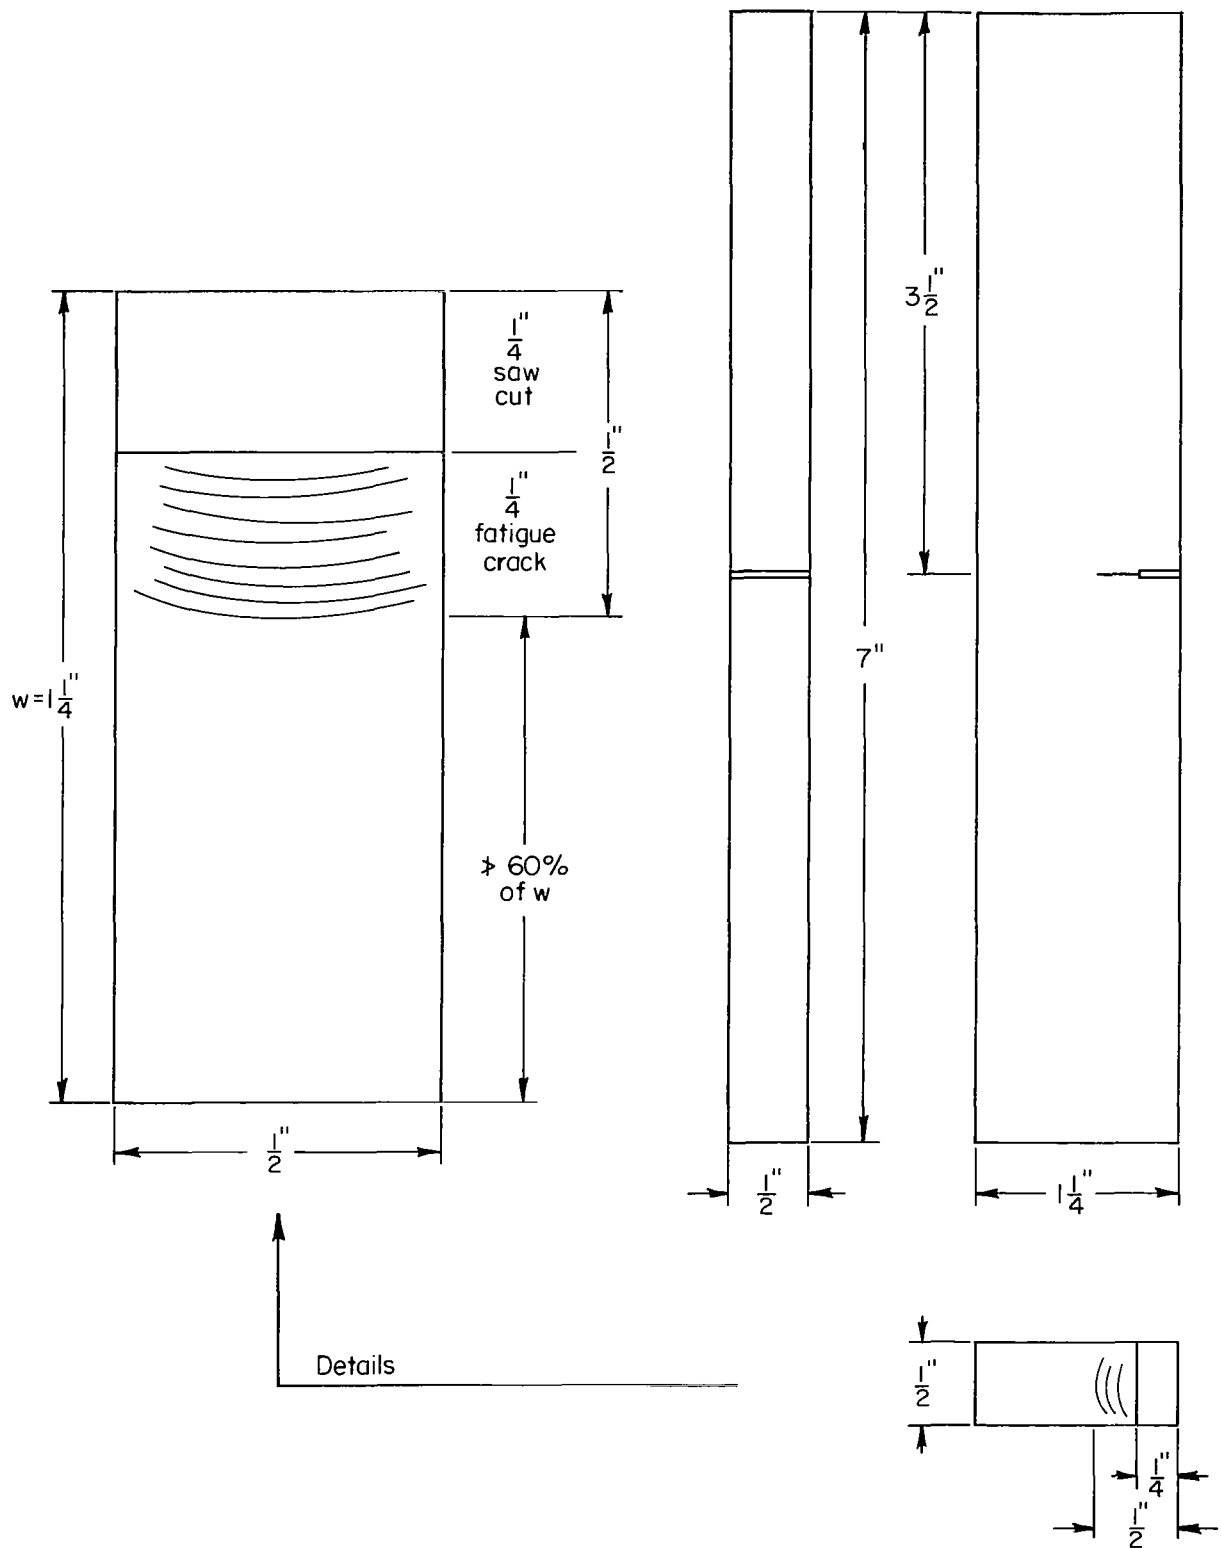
GEOMETRY OF 1/2-INCH-THICK SPECIMENS, CANTILEVER NOTCH BEND TEST
